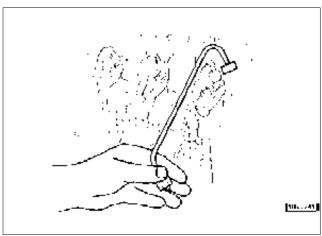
Install pump-to-injector pipes as well as the fuel recovery pipes from injection pumps and injectors;
